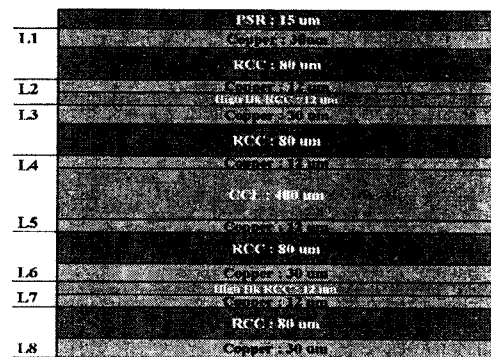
Cross-sectional view of 8 layer PCB standard processes to fabricate the embedded passive components.
